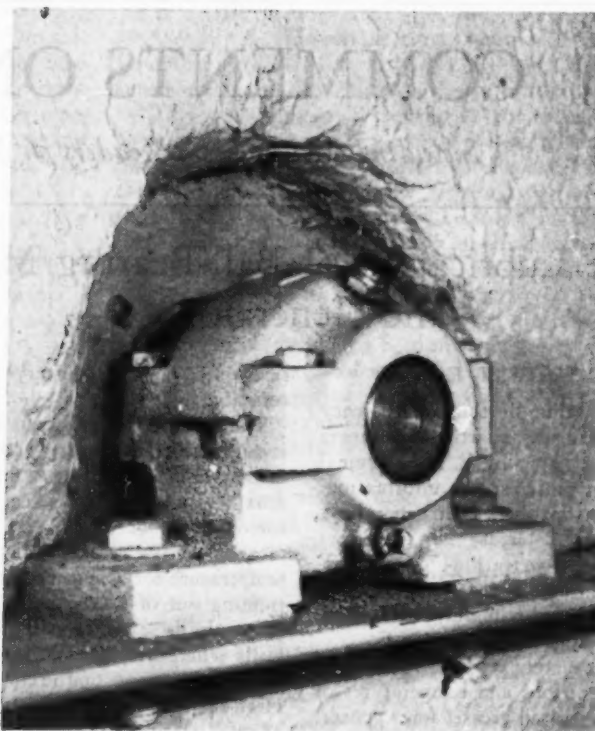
FAN BEARING USED FOR TEST PURPOSES
